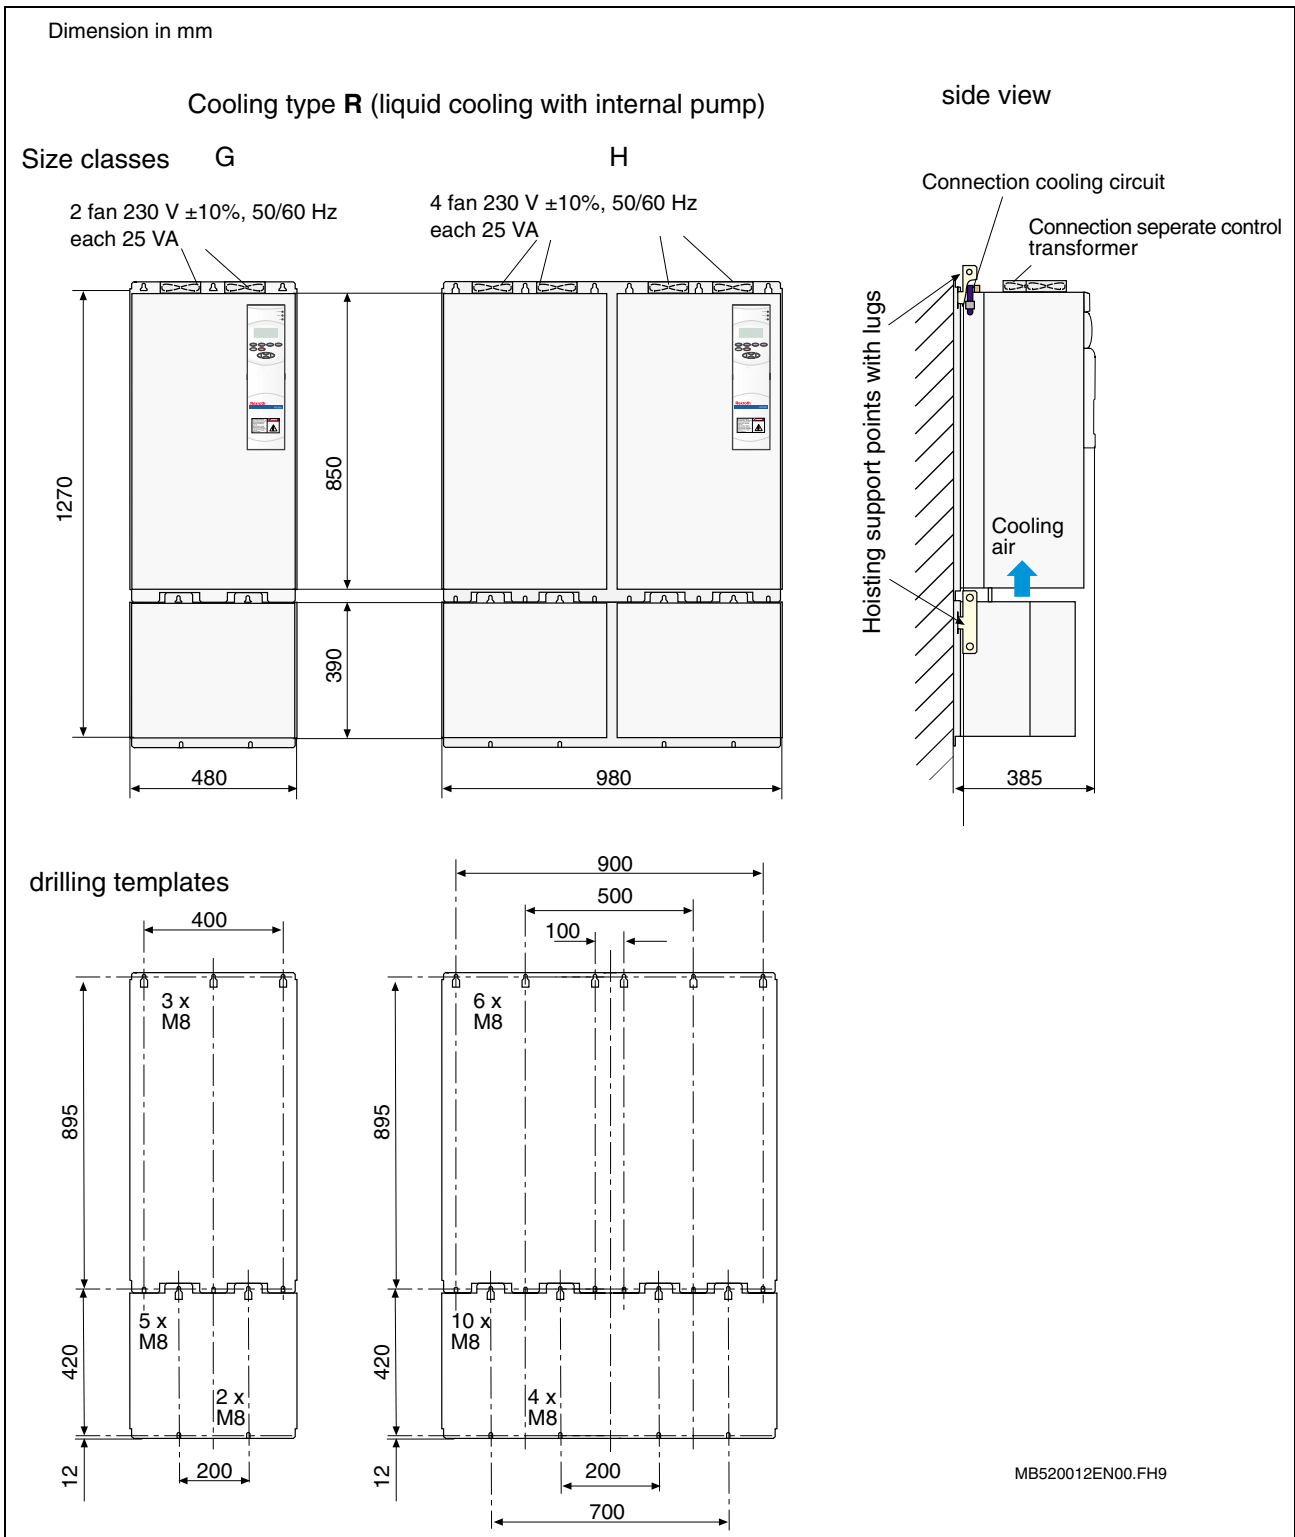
Dimension sheet of converter, size classes G and H, with cooling type R
